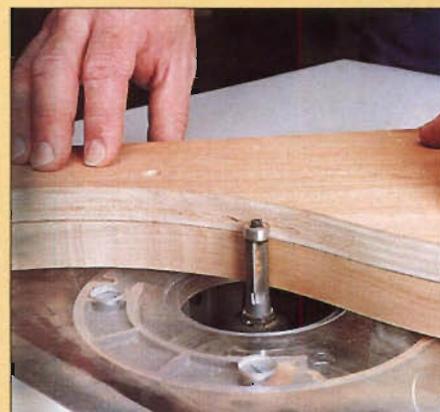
Photo A: Bandsaw outside the line, then attach pattern and flush-trim the edge of the crown molding to shape.
